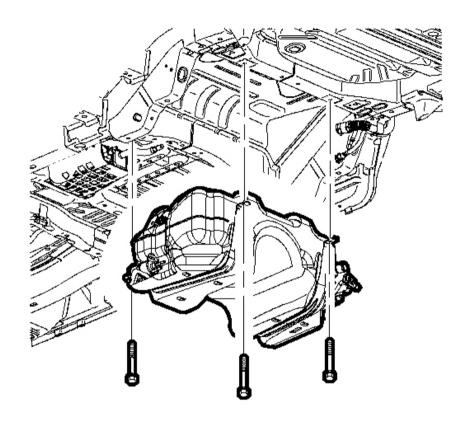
View Of Fuel Tank Heat Shield & Fuel Tank Assembly Into The Vehicle Courtesy of GENERAL MOTORS CORP.
